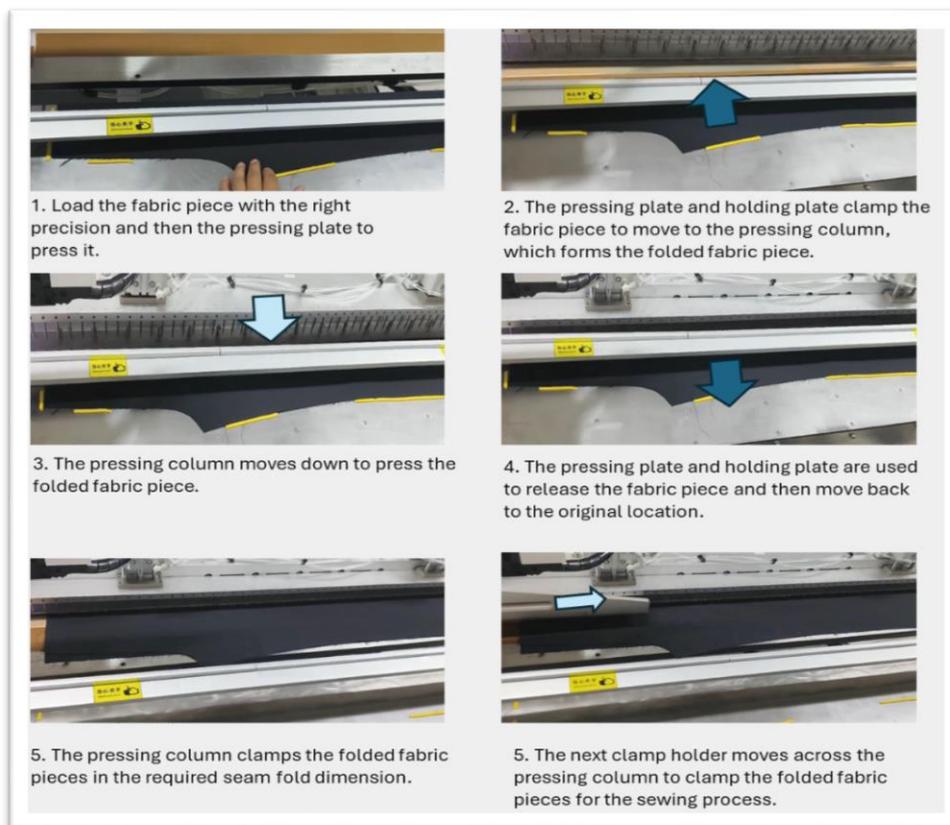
The steps of the clamping mechanism of the Automated Mid-leg Seam Folding and Sewing Machine
